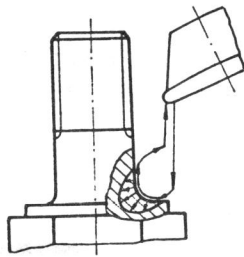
Mechanical surface hardening of the fillet under the screw head.
